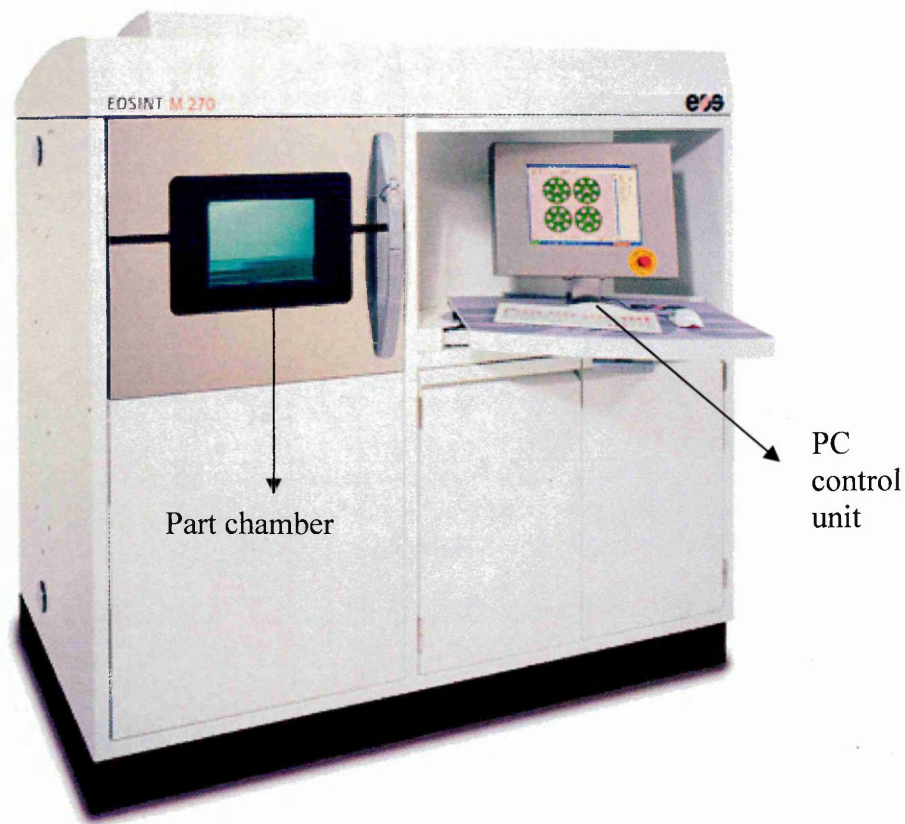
EOSINT M270 direct metal laser sintering machine. [57]
